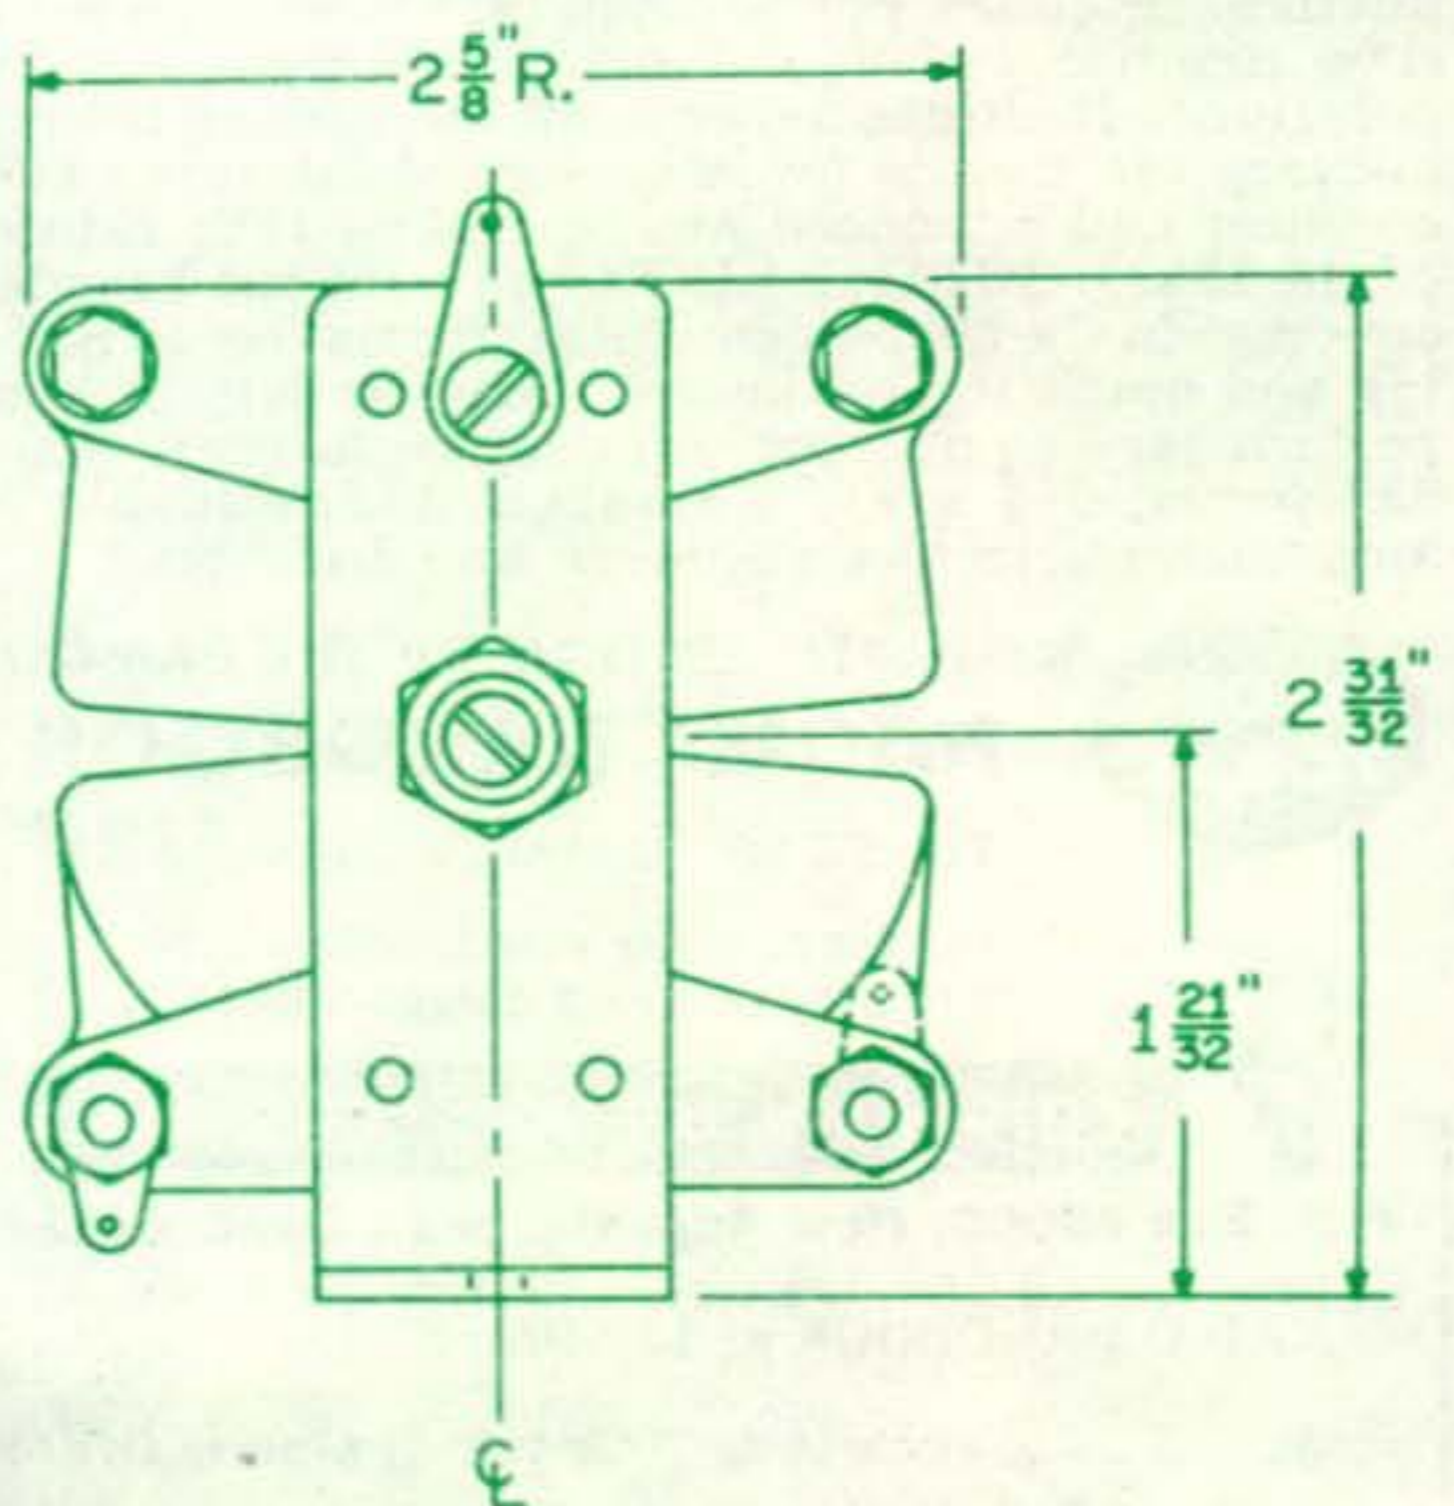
Drawing of the front view of the duo differential capacitor showing construction and dimensions. A top view of this capacitor may be seen in the accompanying photos.
